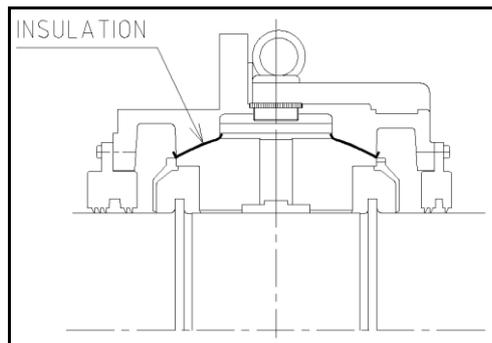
2 – Finned, Centrally Flanged-Mounted Bearing (Typical)
